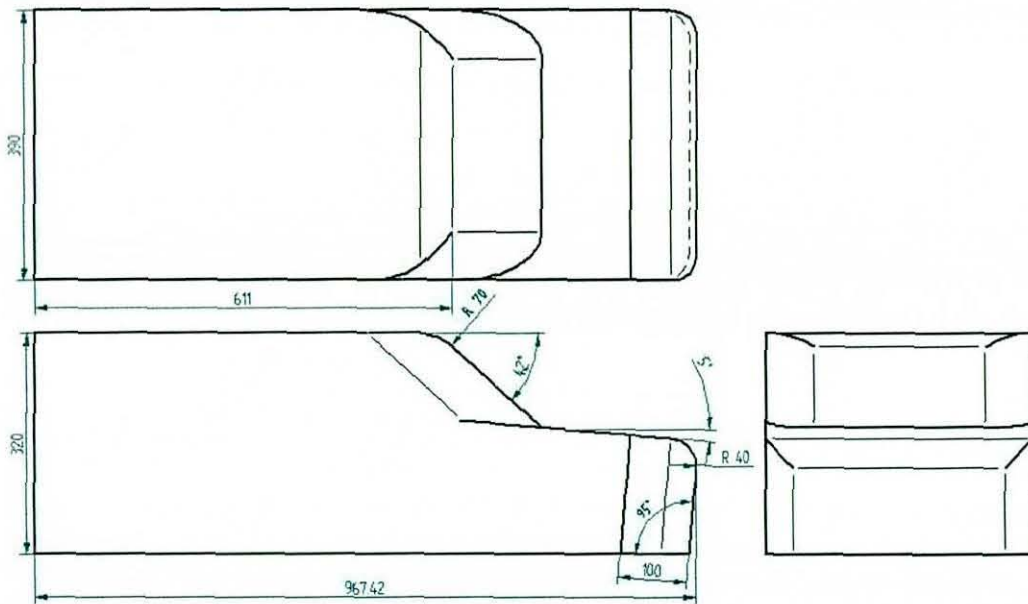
Dimensioned drawing of the 2-box model (40mm front section fitted)
